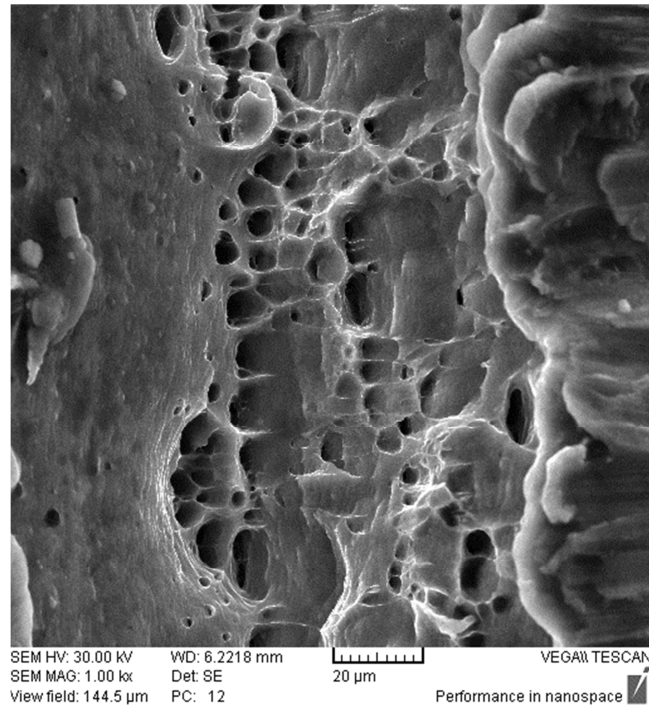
Tensile fracture surfaces of initial sample
